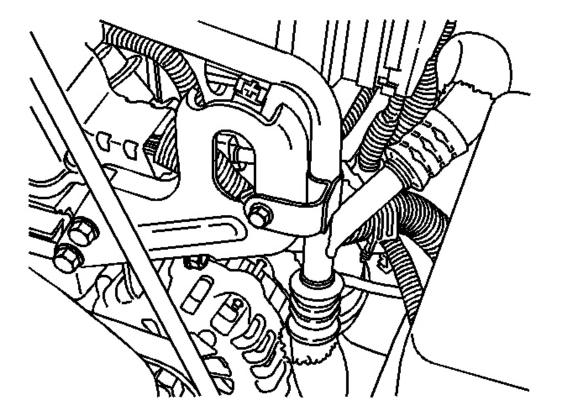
View Of Engine Lift Hook & A/C Bracket Bolt Courtesy of GENERAL MOTORS CORP.
